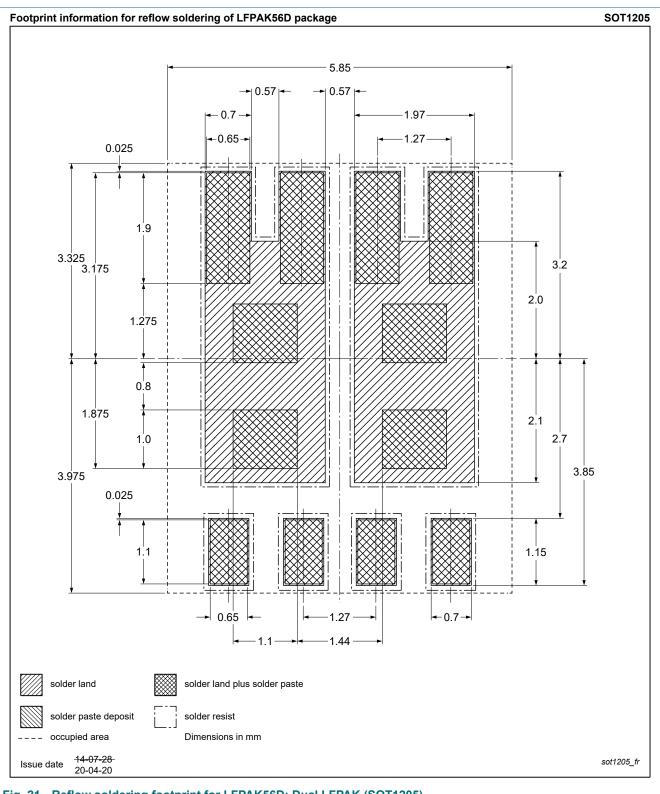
Reflow soldering footprint for LFPAK56D; Dual LFPAK (SOT1205)
